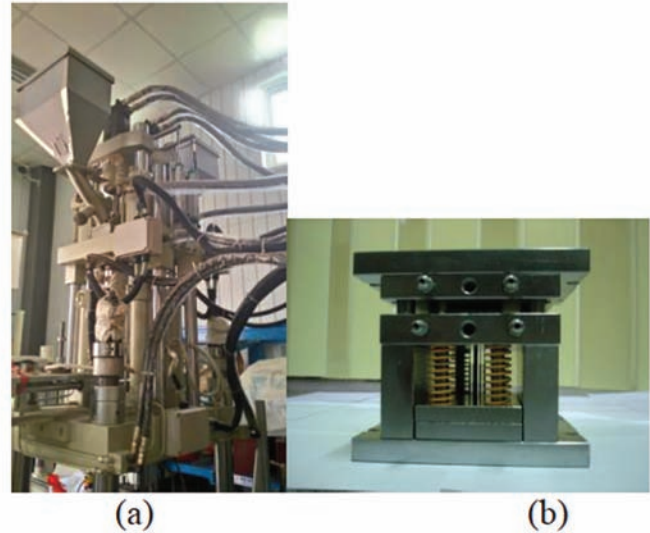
Experimental study: (a) Injection molding machine: TA-4.OST-2ST-80T; (b) the mold design and construction.
